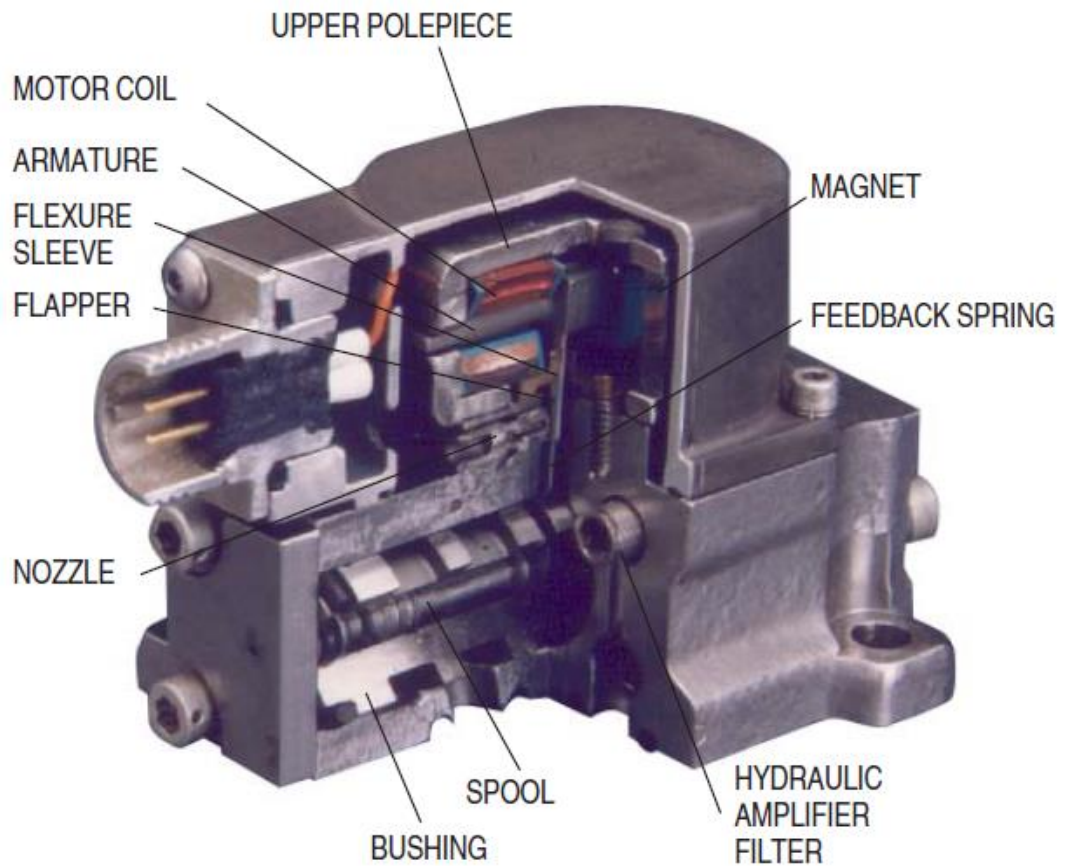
Cross sectional view of Moog Series 31 Servovalve [4]
